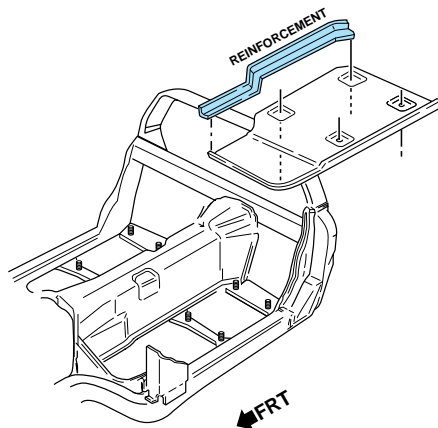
Reinforcement Bonded to Tunnel and Floor
